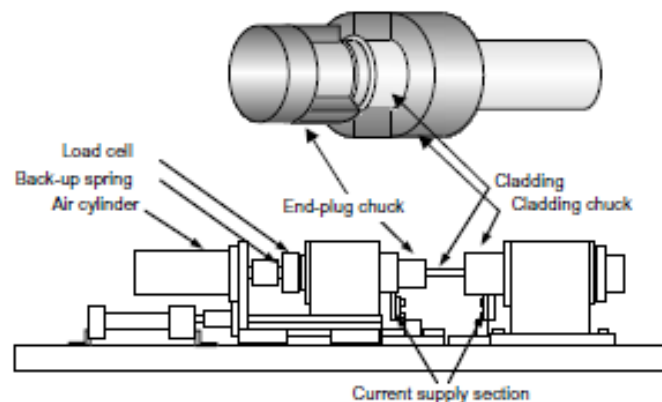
Schematic of the pressure resistance welder PRW unit. [46]
